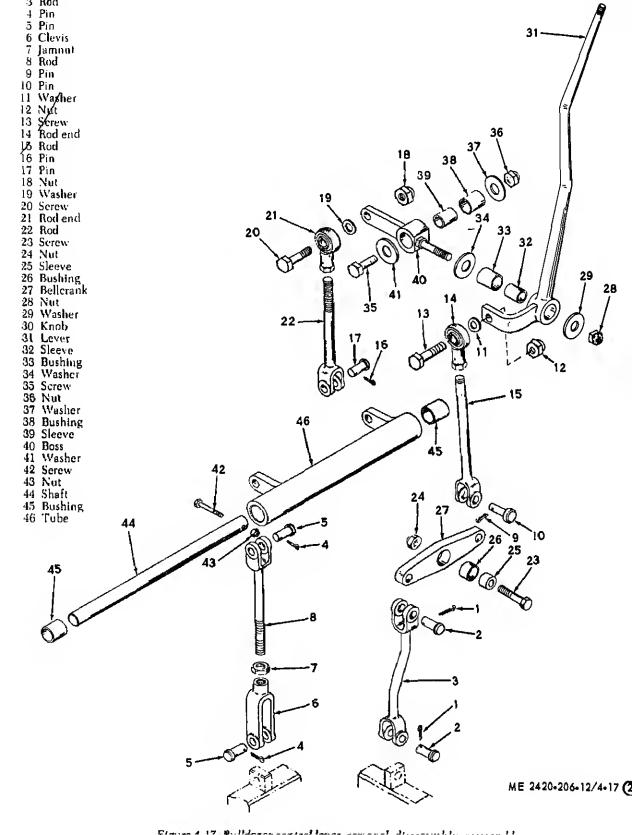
Bulldazer cantrol lever, remaval, disassembly, reassembly and installation (sheet 1 of 2).
